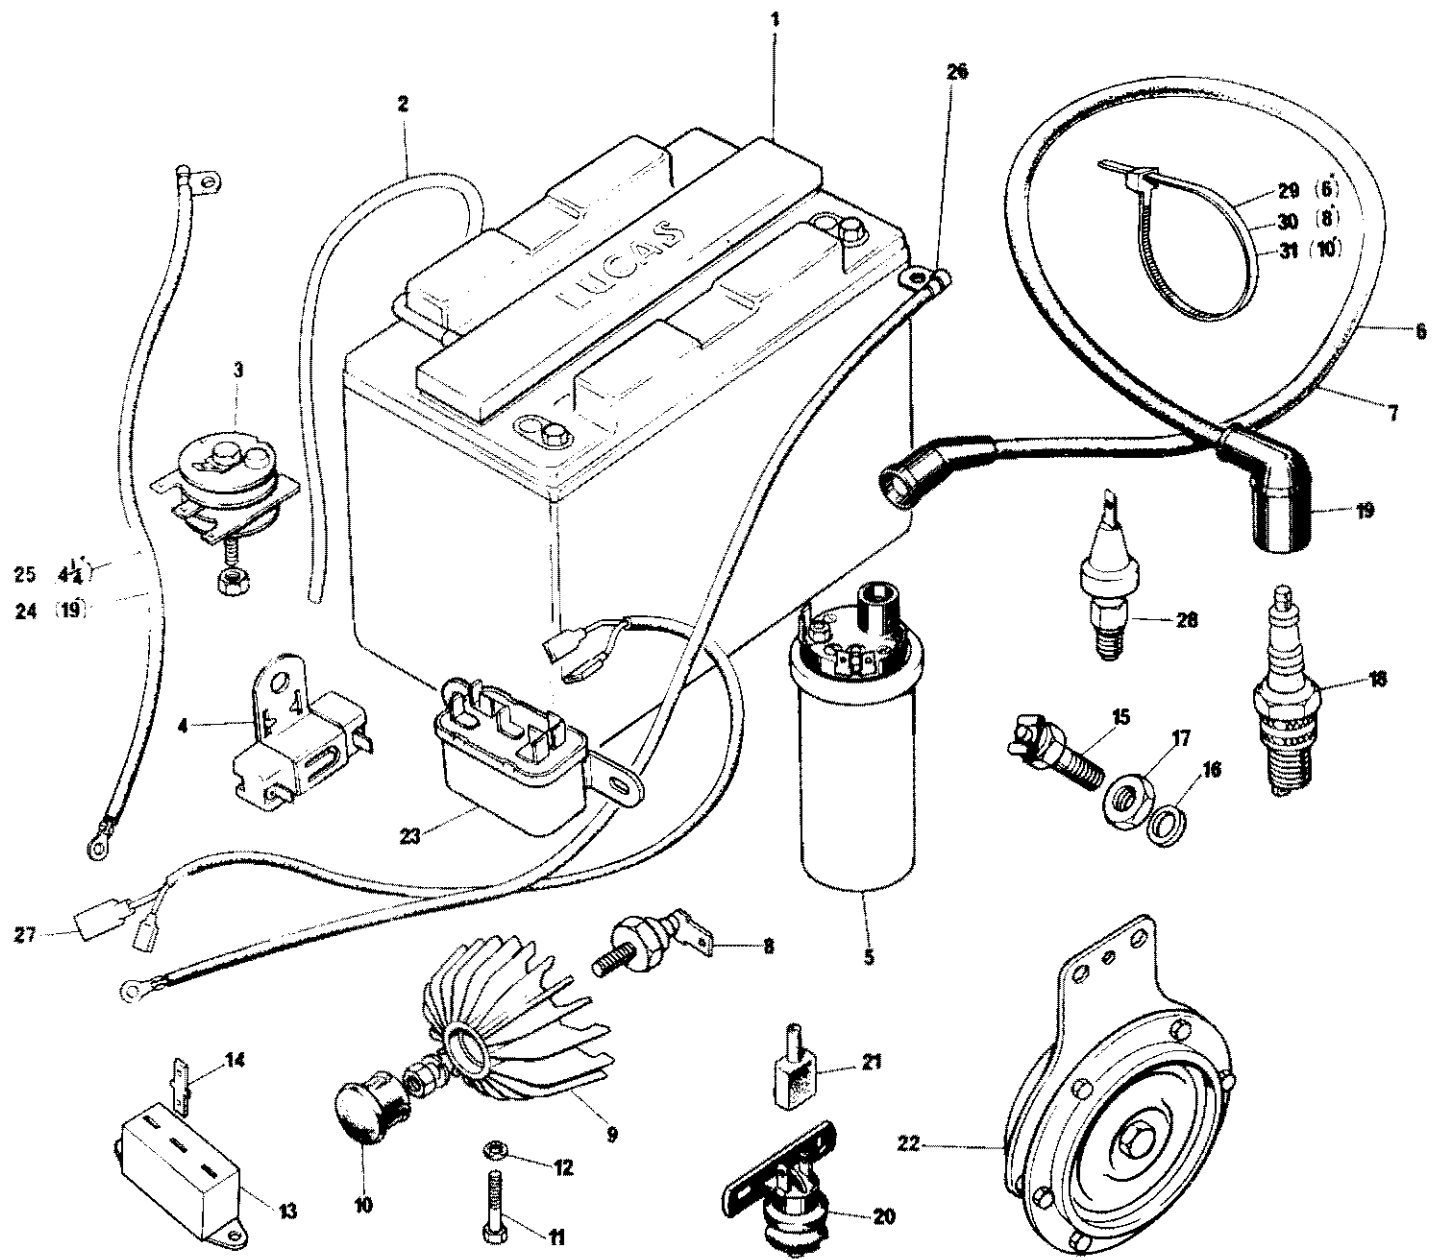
ELECTRICAL EQUIPMENT—COILS, RECTIFIER, BATTERY, ETC.
